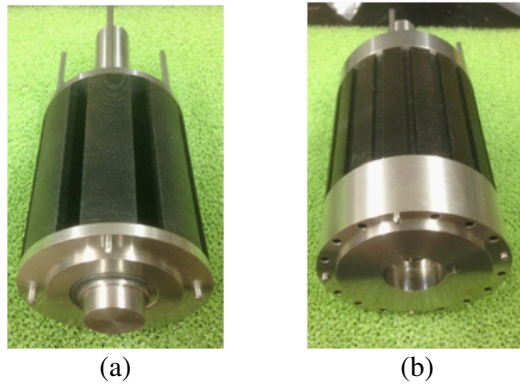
(a) Inner rotor (without magnets) and (b) cage rotor during assembly.
